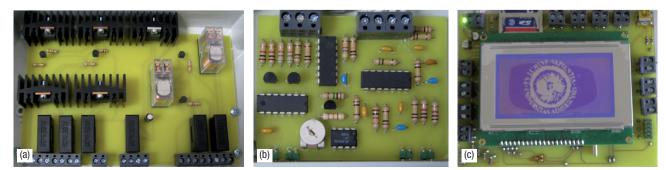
The valve driver board (a), the ultrasonic sonar board (b) and the embedded controller board (c).
